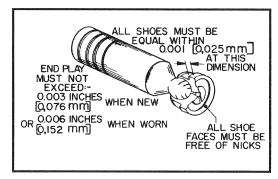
PISTON and SHOE INSPECTION (5V-12015-L).
